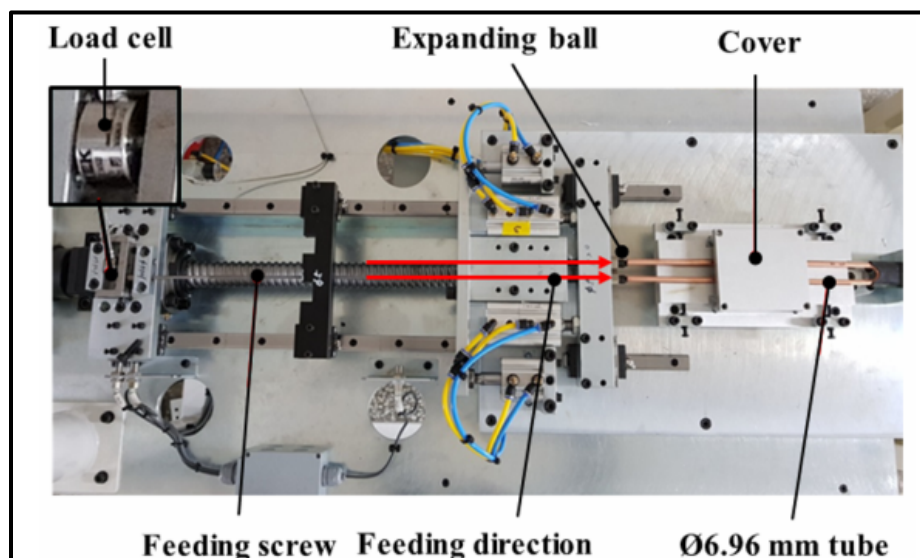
Tube expansion test rig with grooved die (Kang et al.,2019)
